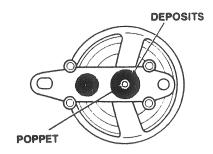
Deposits in the EGR valve ports. (Courtesy of Ford Motor Co.)
